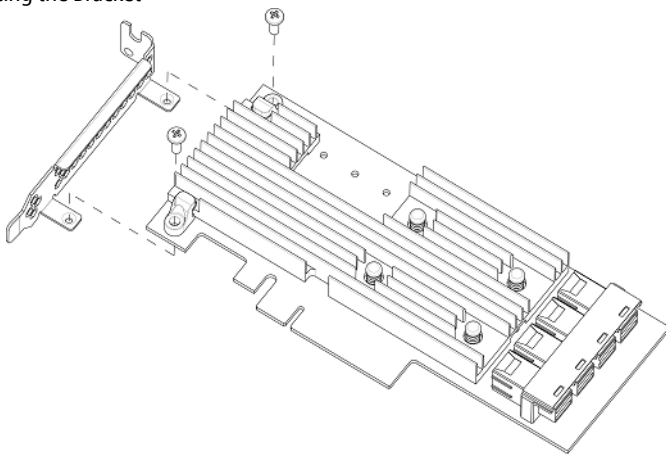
Heat Sink Held in Place by Retaining Clips Attached by Bracket Screws
